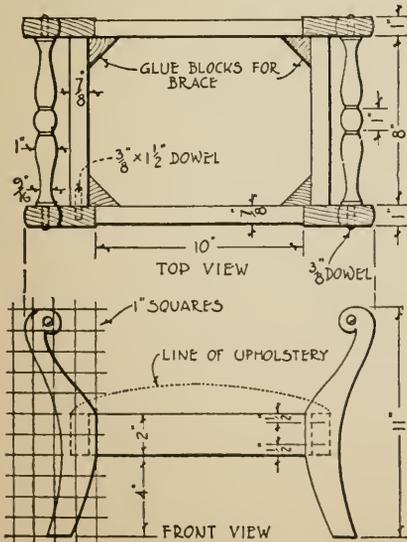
Dimensioned views which show the shape of the leg and spindles and the exact location of the dowels.
